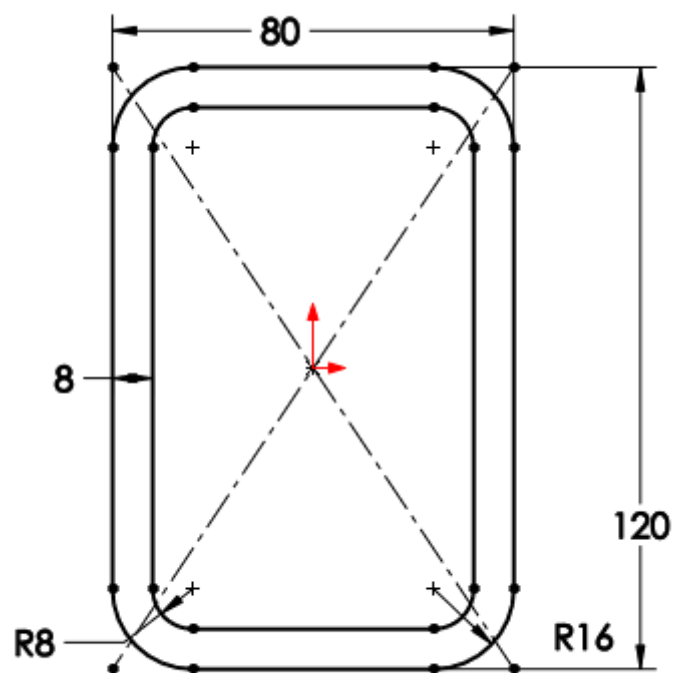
Weldment profile RHS 120\*80\*8 for two long side members
